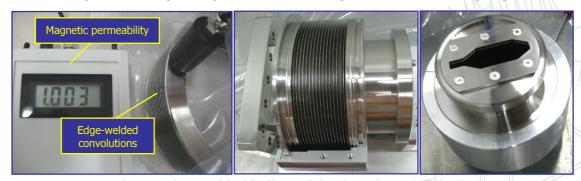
Edge-welded bellows (check and assembling)
